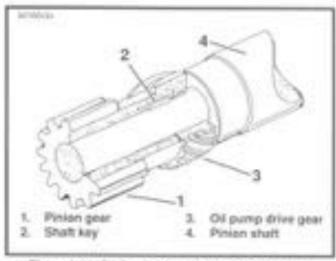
, Oil Pump Drive Gear and Pinion Gear Installed on Pinion Shaft
